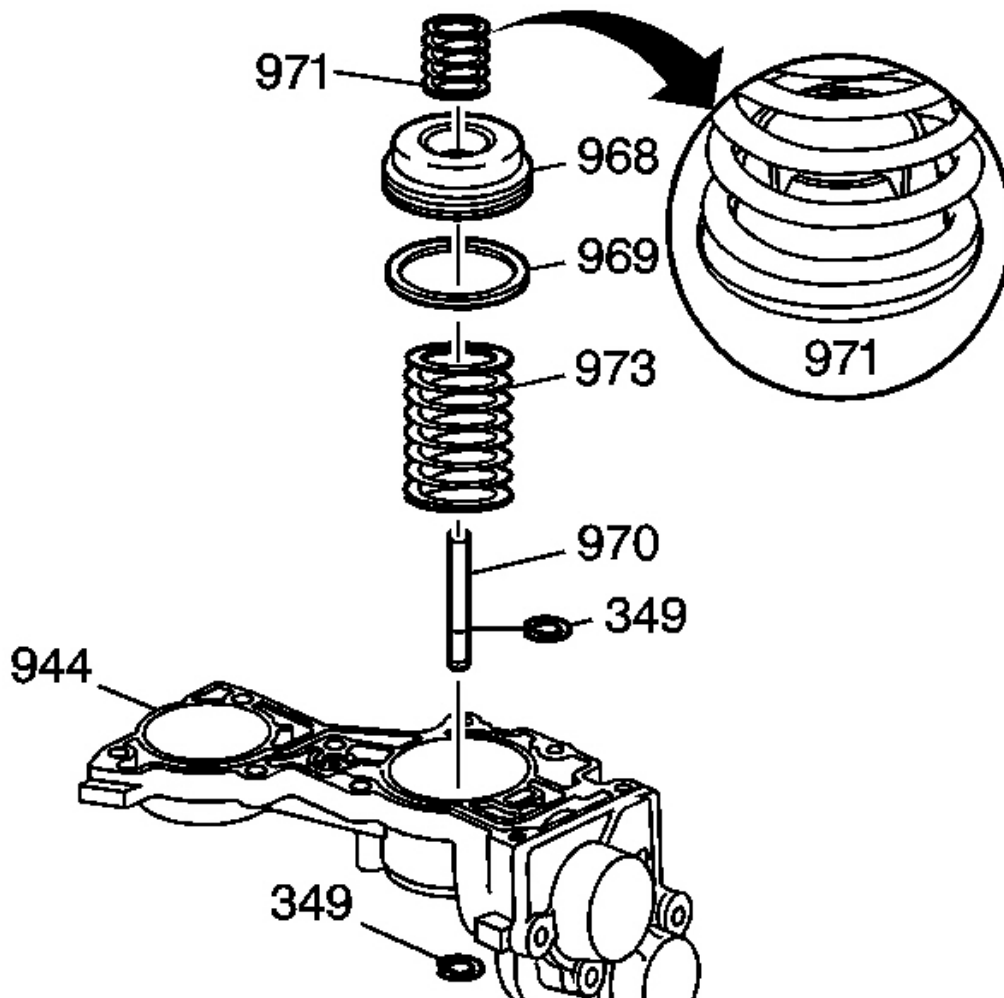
Expanded View Of 1-2 Accumulator Assembly
